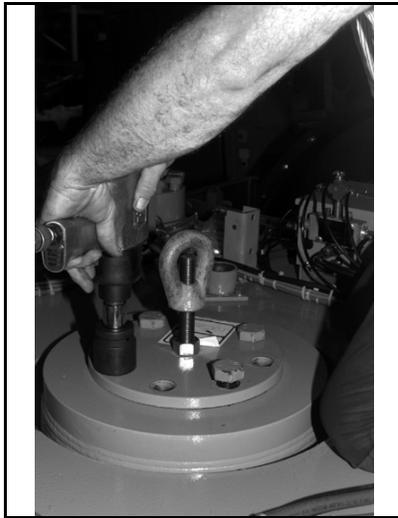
Install Hydraulic Fitting Equipped Cylinder Cover
